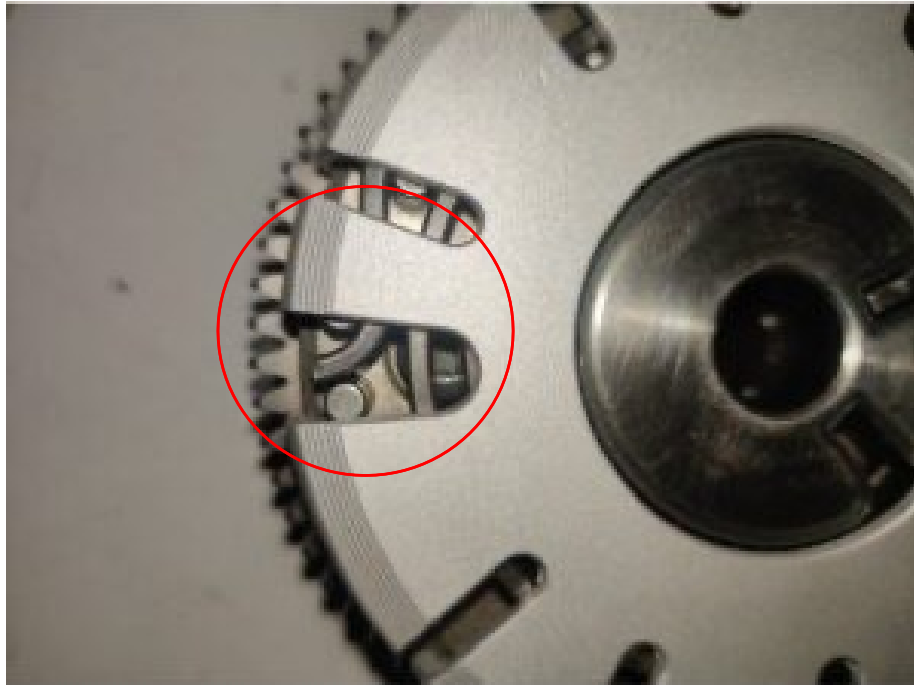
The narrowest sash with the largest recess must be positioned so that the outer end of the spiral spring of the Vanos adjustment device is visible.
